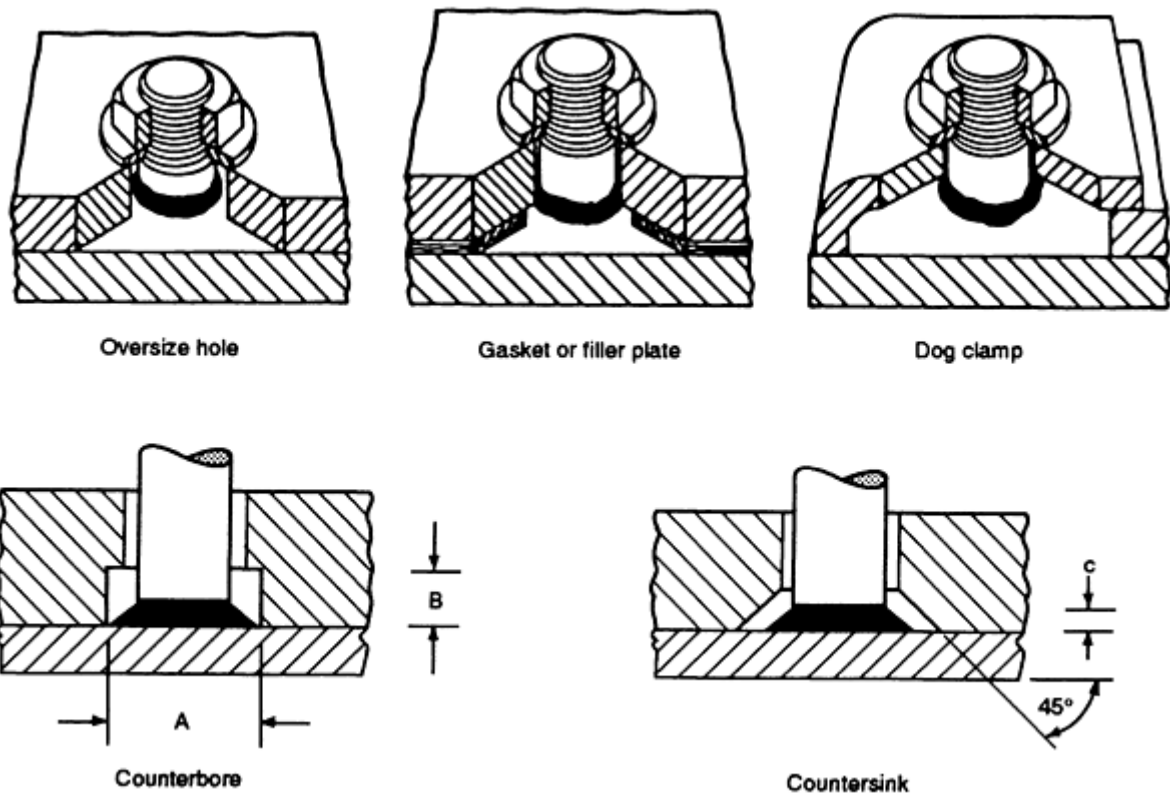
COMMON METHODS FOR ACCOMMODATING WELD FLASH (FILLET) WITH STUD ARC WELDS. TYPICAL DIMENSIONS FOR A, B, AND C ARE GIVEN IN TABLE 4.
